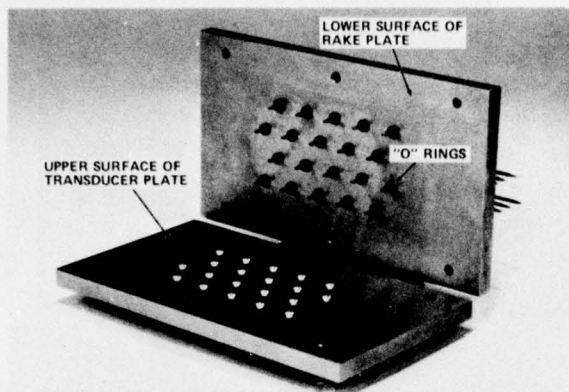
TRANSDUCER PLATE AND RAKE PLATE ASSEMBLY
